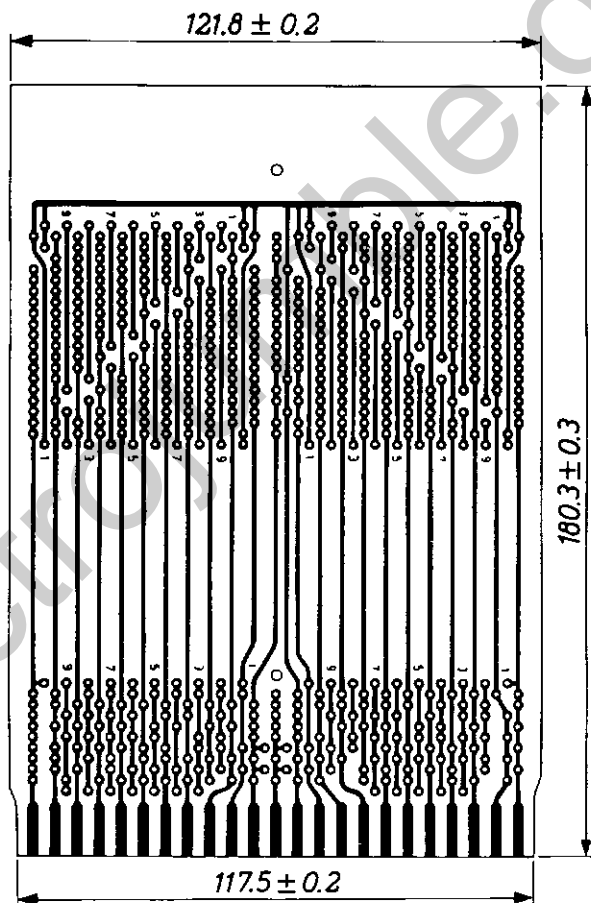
Universal Printed-Wiring Board Type P8 901 46.2
